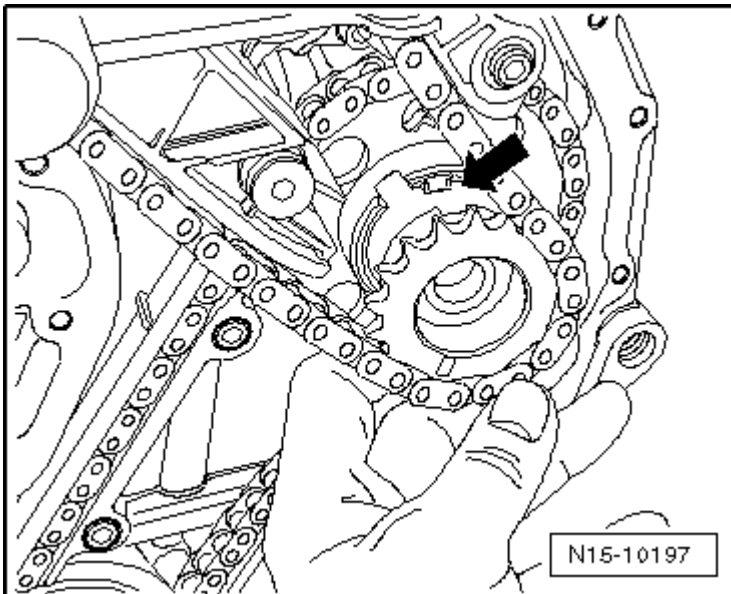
Inserting Small Drive Pinion With Installed Chain Into Recess And Bolt It On Hand-Tight
